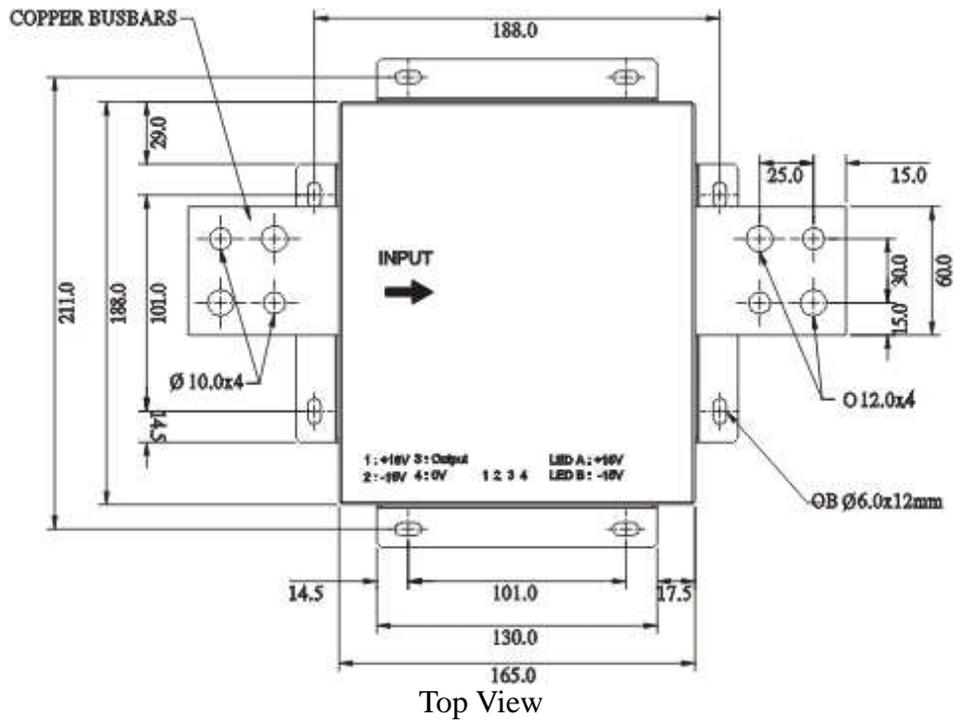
Hall CT Kit (HCT) 2000A Dimension Drawings
